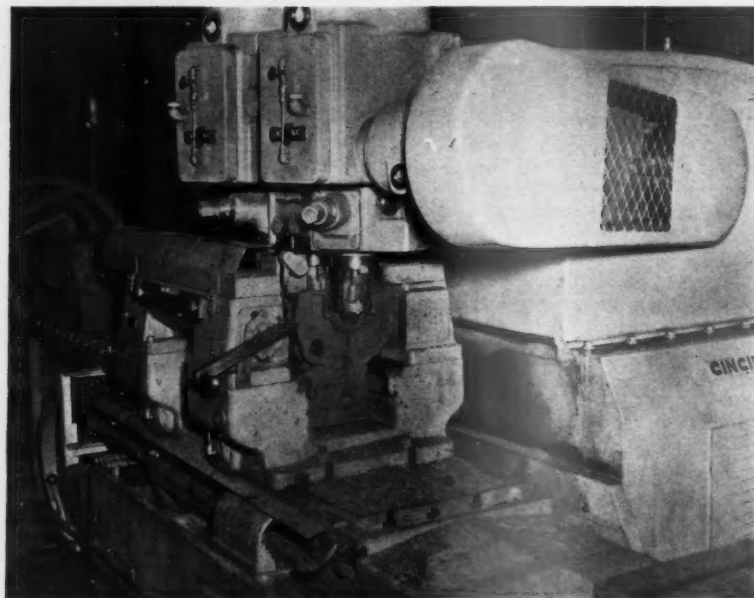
Set up for milling the bearing cap seats, tenons and side faces on a special Cincinnati machine.
